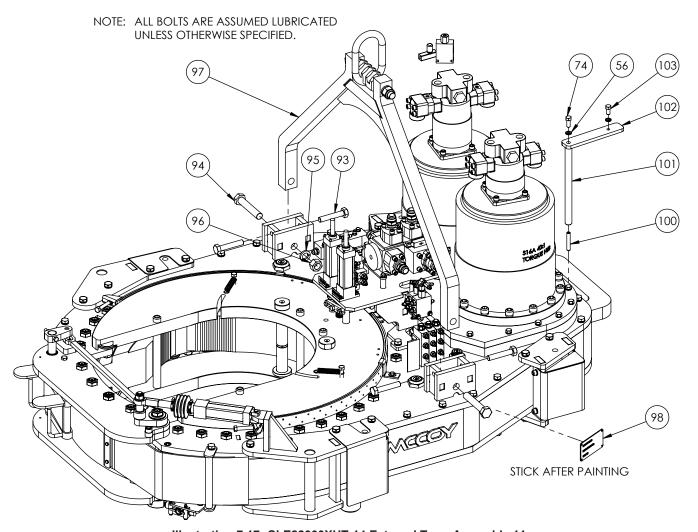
CLE22000XHT-14 External Tong Assembly 11
